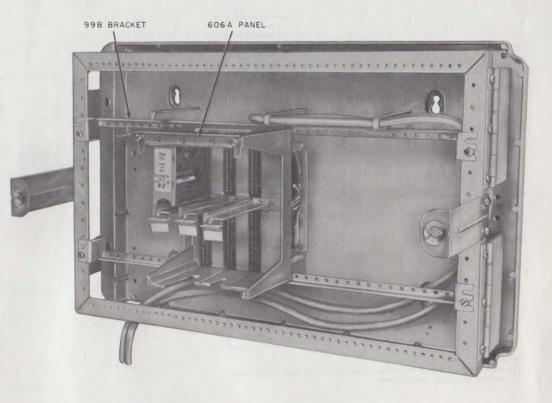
\$606A Panel Mounted in 16C Apparatus Mounting
